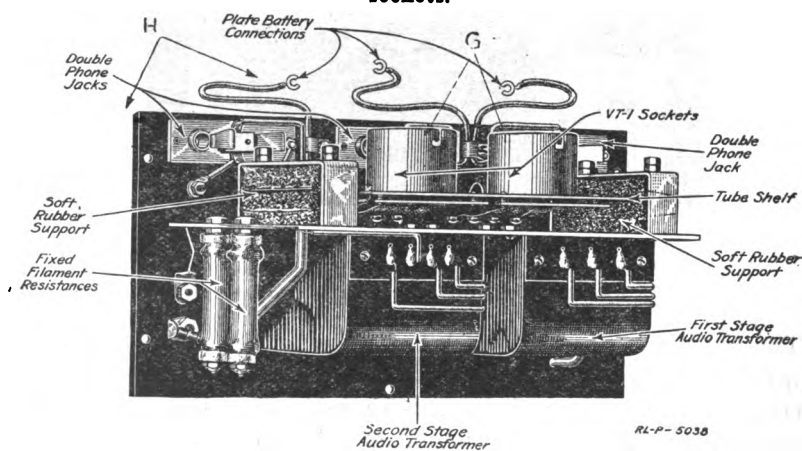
Panel of set box BC-17 removed to show interior parts.
